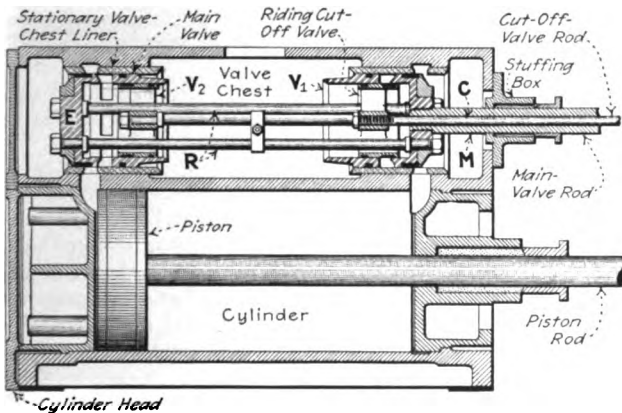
Piston-type riding-cut-off valve. (Longitudinal section through cylinder and valve chest of "Buckeye" simple engine.)
